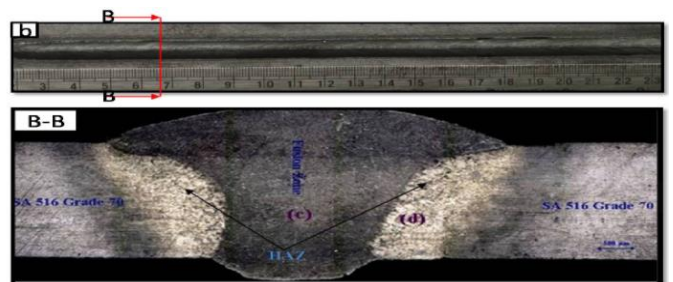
(b) Laser GMA hybrid weldment (B-B) Macrograph of laser GMA hybrid weldment [10]
